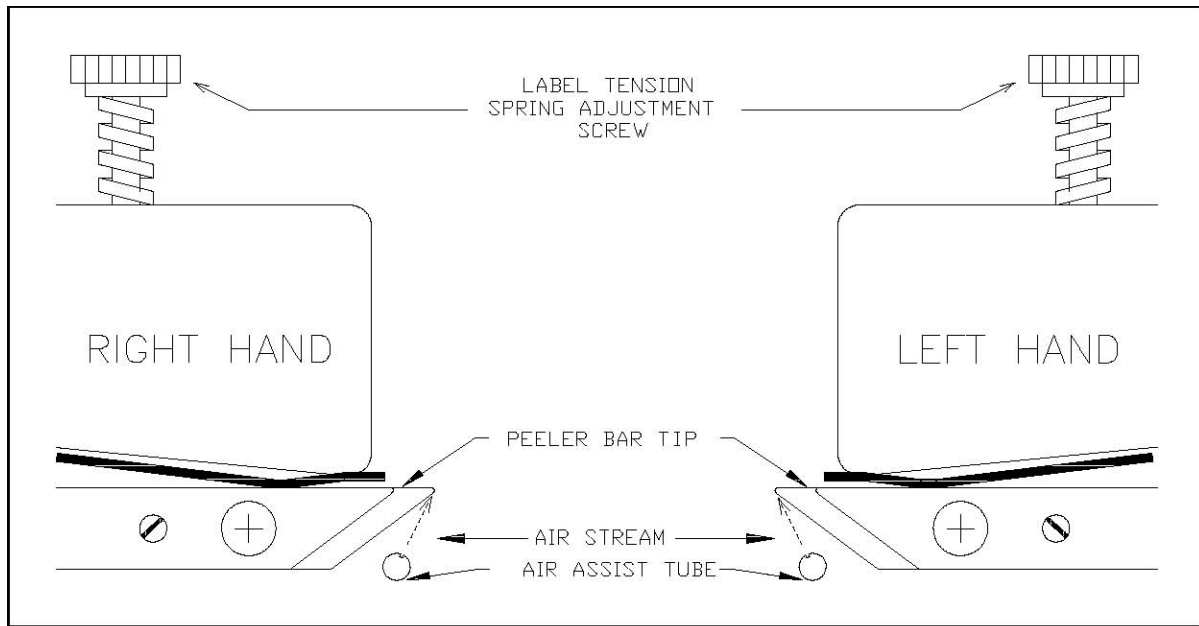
Air Assist Tube Adjustment To Correct Adhesive Strings
